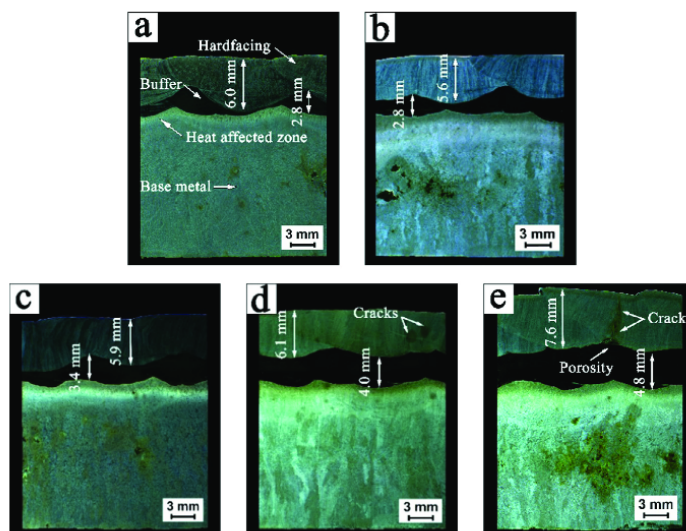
The macrostructure of welded samples: (a) MA; (b) FE; (c) FE+PD1; (d) FE+PD2; and (e) FE+PD3.
